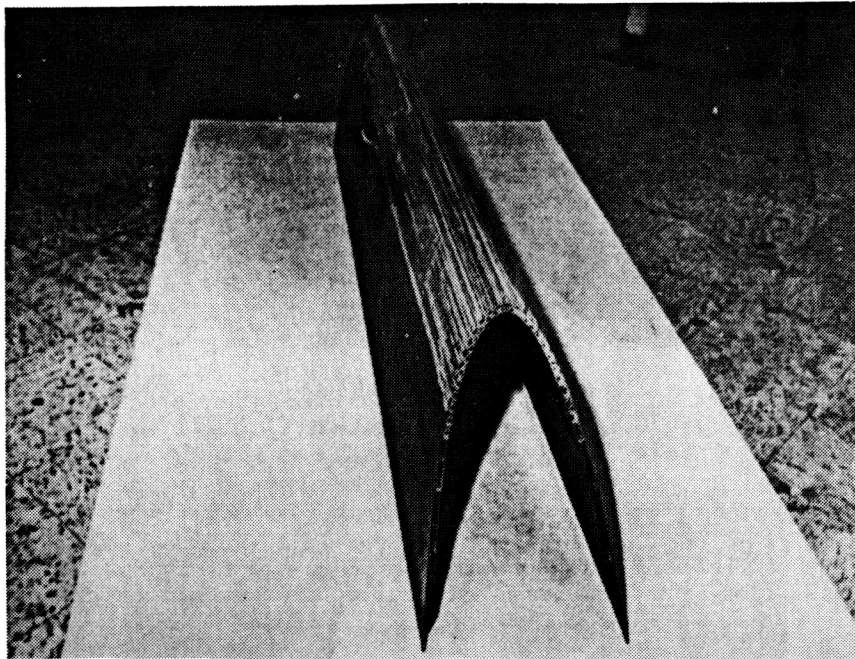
Flight Article Subassembly with Peel Ply Partially Removed
